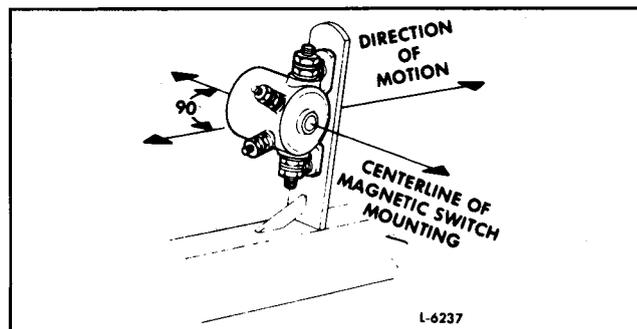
Starter Auxiliary Magnetic Switch Mounting
